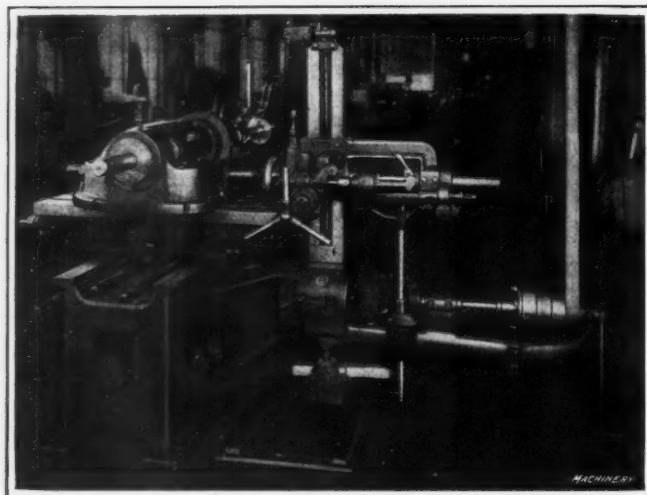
Arrangement of Lucas Boring Machine and Barnes Drill for machining Holes in Saddle
